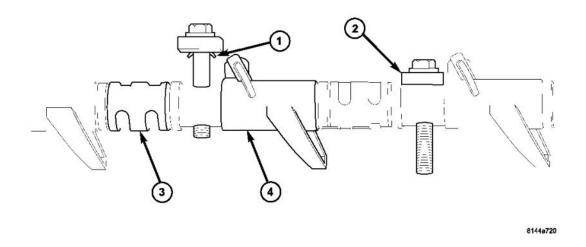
Rocker Arm Retainer Assembly Courtesy of CHRYSLER LLC
